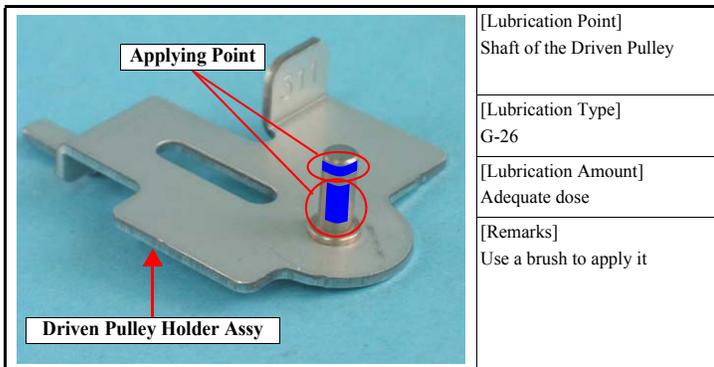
Lubricating the Driven Pulley Holder Assy
